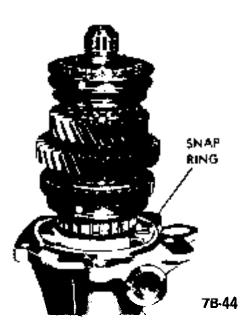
B-44 Mainshaft Assembly Secured Into Rear Bearing Retainer by Snap Ring
